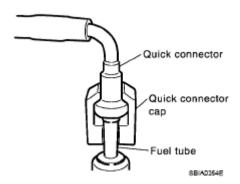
Identifying Quick Connector Cap On Quick Connector Joint
